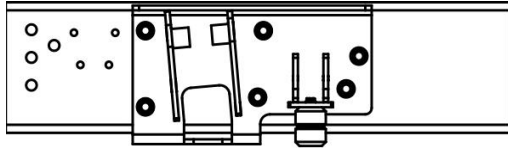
Passenger Side (RH) Upper Strut Mount Installation.
